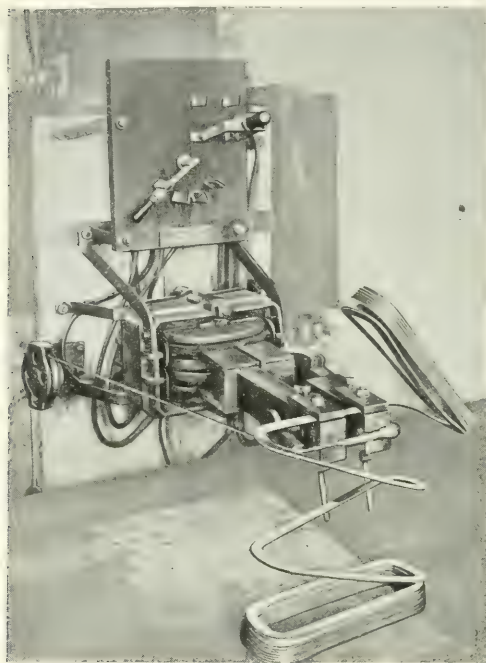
ELECTRIC WELDER FOR STRAP COPPER
